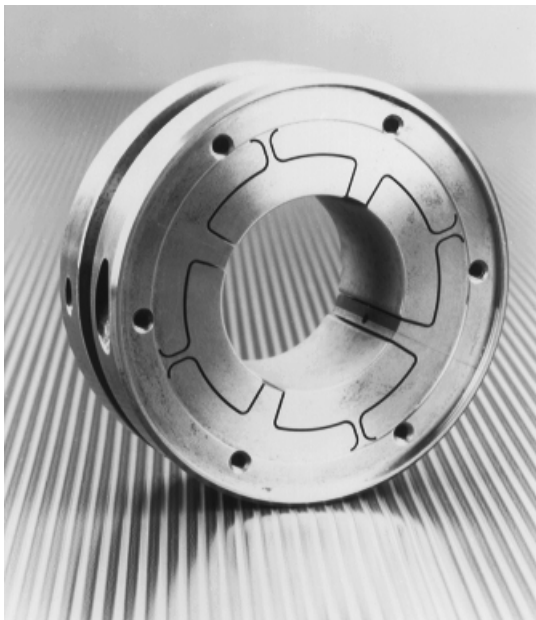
Radial Flexure Pivot tilt pad bearing, split design. (*Bearings Plus, Inc., Houston, TX.*)
